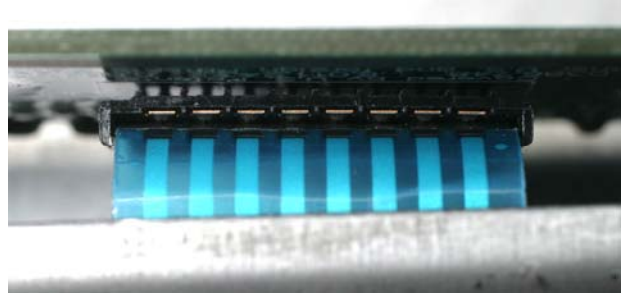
The ribbon cable is shown fully seated in the connector block on the display side of the board.
